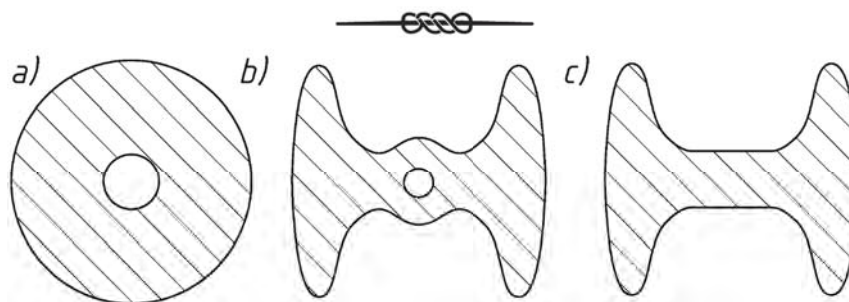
Types of main sections of the connecting rod of marine engines: *a* – round with drilling for supplying oil to the upper head; *b* – I-beam with drilling; *c* – I-beam without drilling
